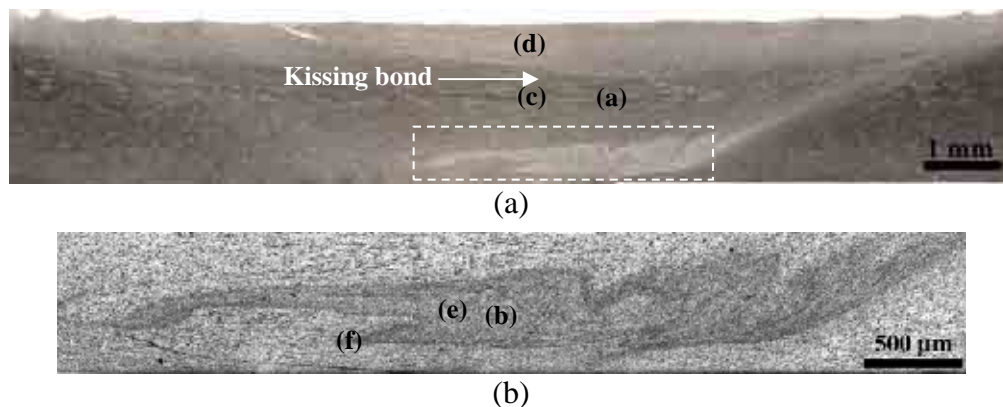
Macrographs for the CC2 weld etched in Keller's reagent showing (a) the weld face, (b) magnified view of the dashed box in (a)
